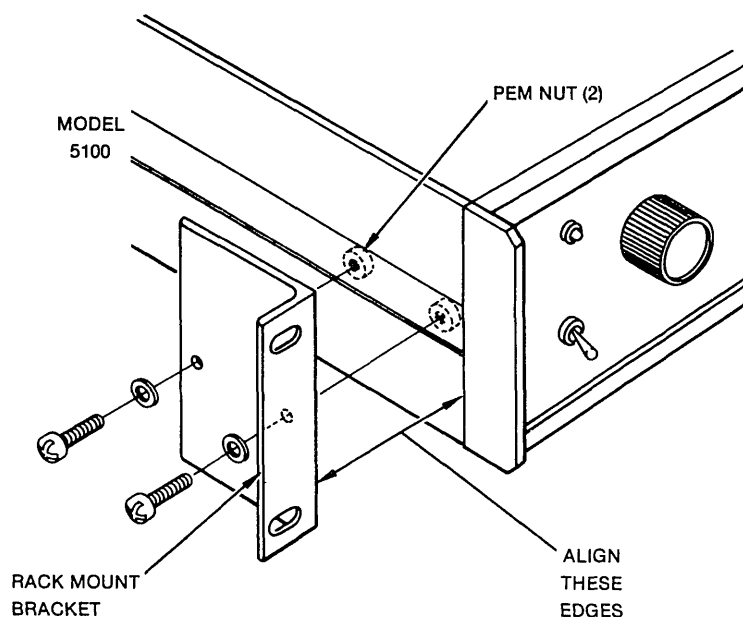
Installing Rack Mount Bracket on Model 5100
